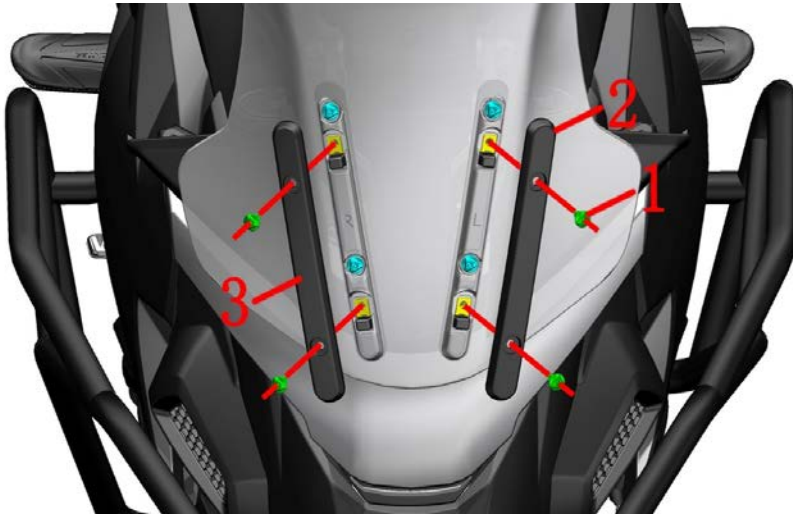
Front Fork Assembly		Windshield Assembly 1	CHK	CAUTION
